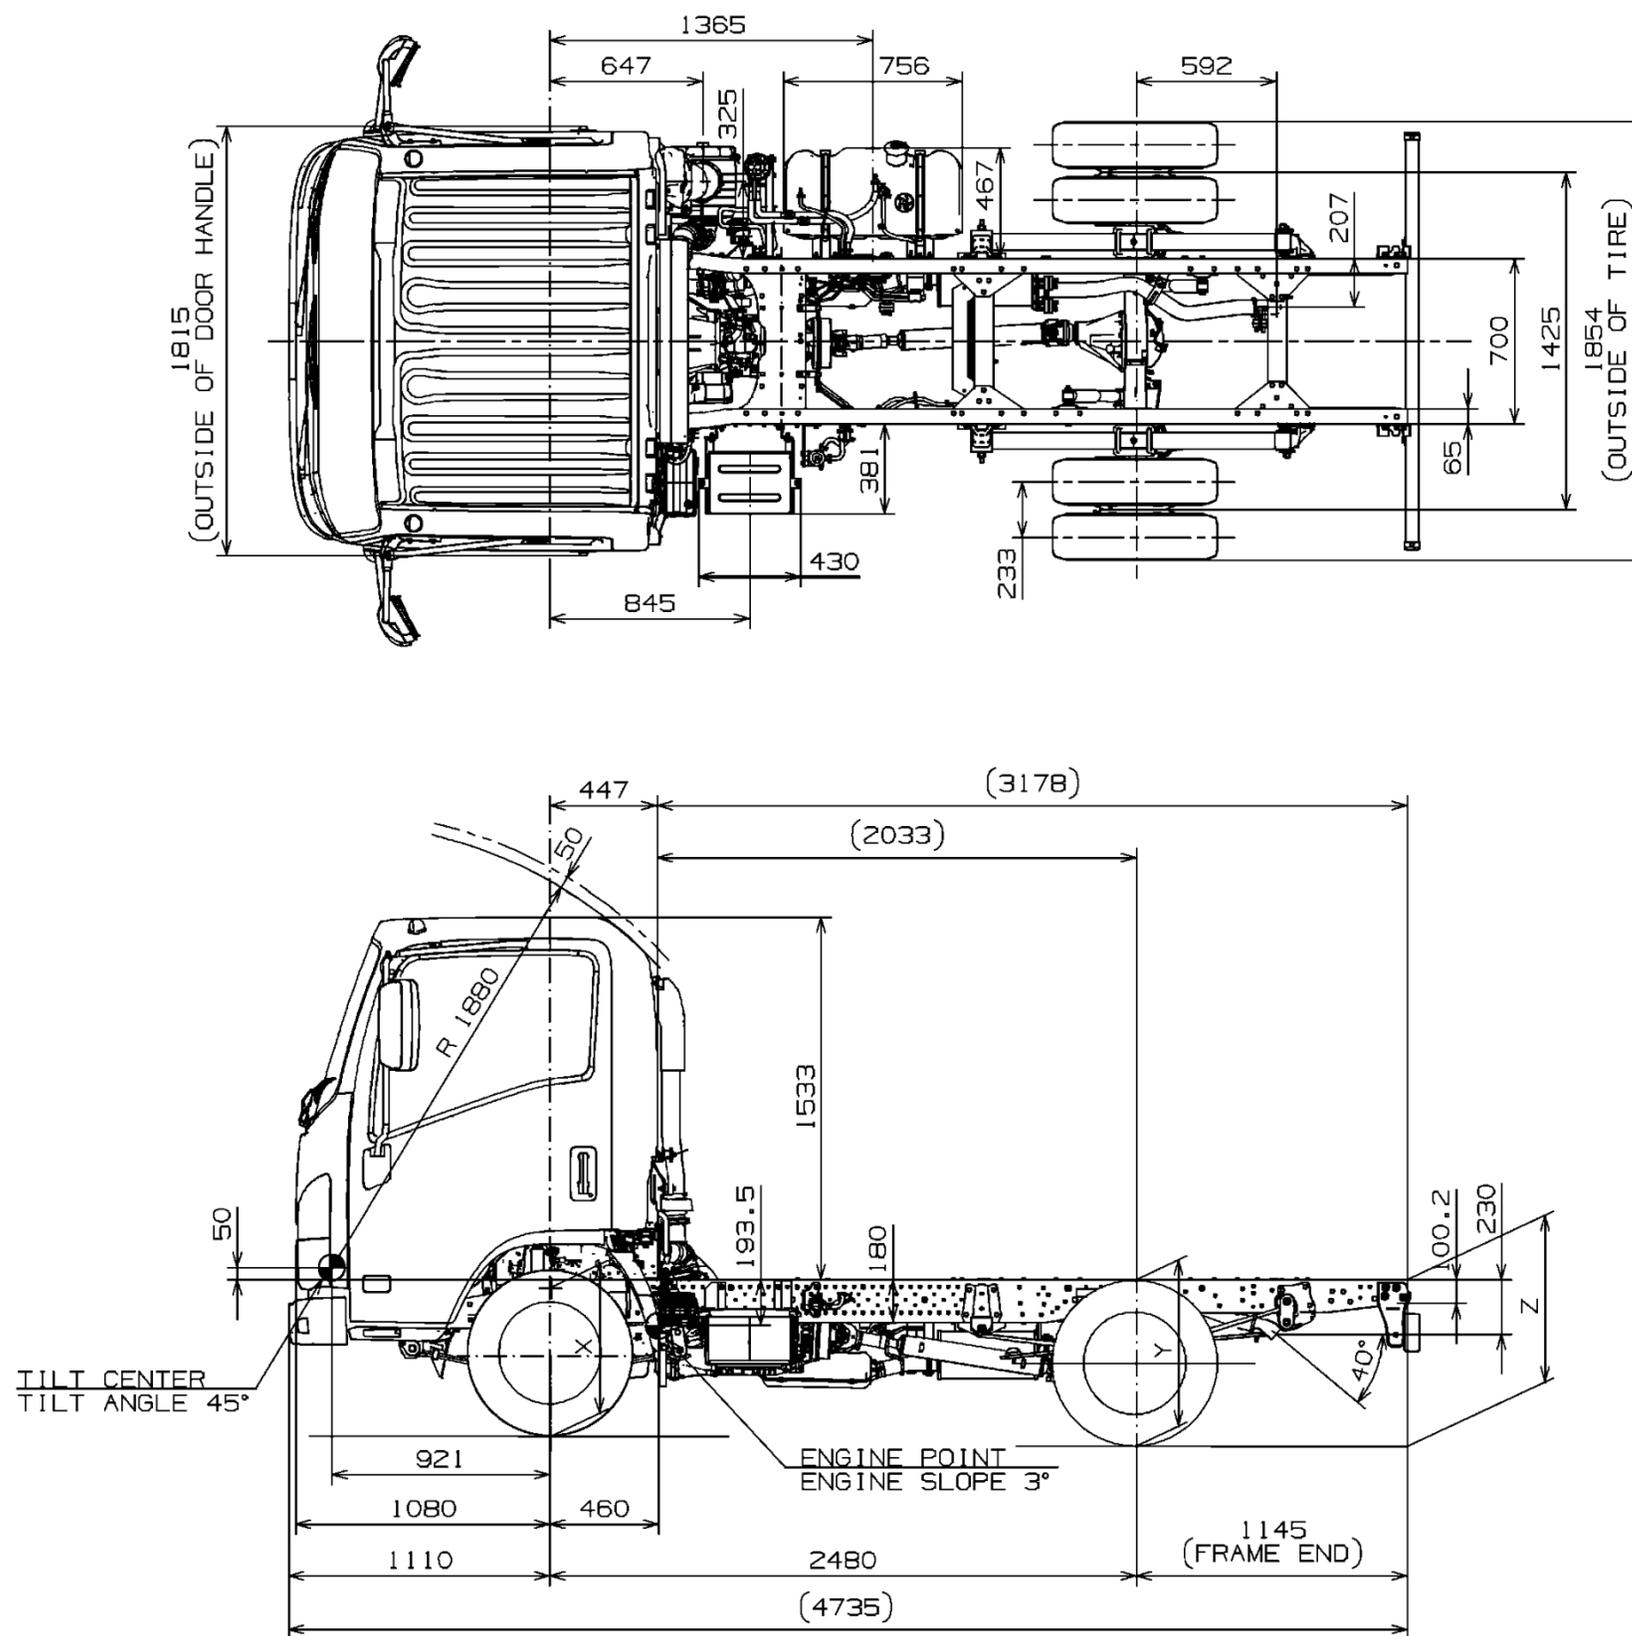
Cab Chassis Drawing NLR85L/U-HD5AYEN
